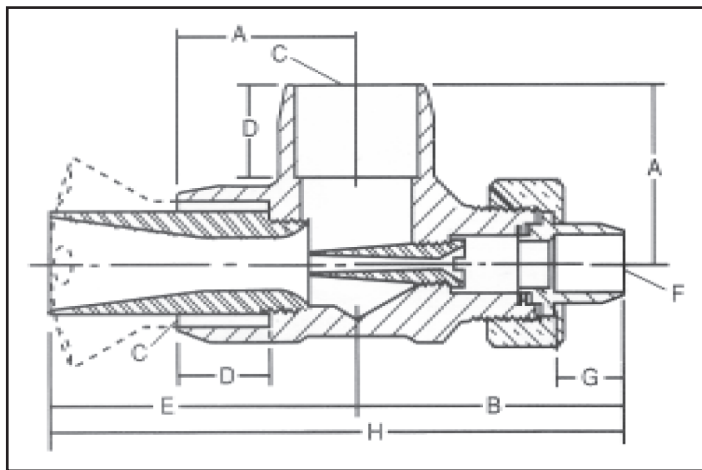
Dimensional Drawing of Series SL and SLD Injectors
